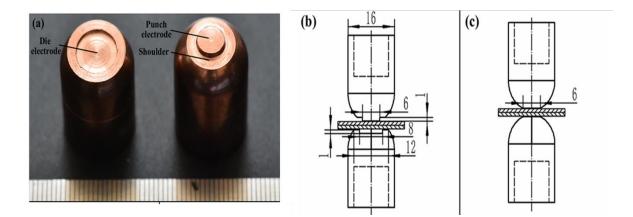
a) Clinch resistance electrode, b) Schematic of Clinch resistance spot welding, c) Schematic of Normal resistance spot welding process [12]
